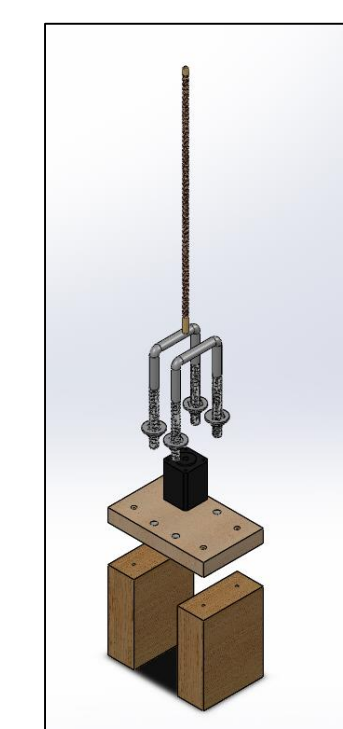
Exploded Assembly of Vertical Stepper-Motor Stand
